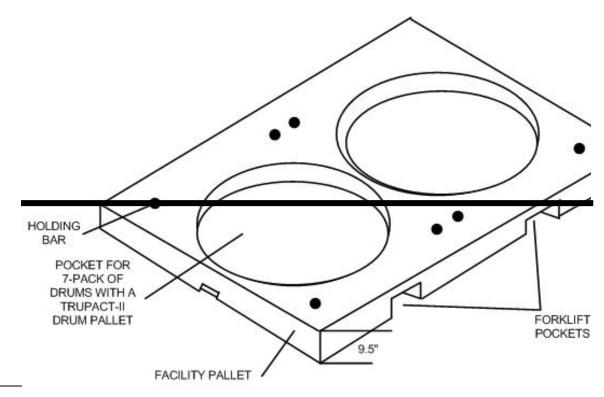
Facility Pallet for Seven-Pack of Drums
